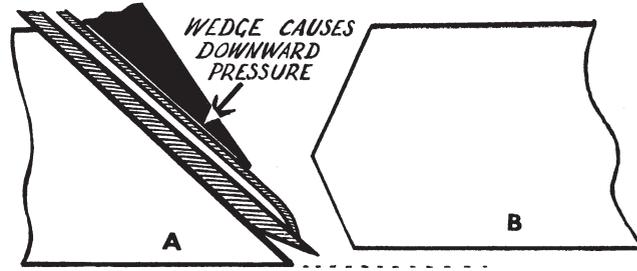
DISTORTION CAUSED BY WEDGE THE CUTTER, ALTHOUGH PROJECTING BELOW FRONT EDGE OF MOUTH CANNOT TOUCH THE WOOD BEING PLANED
